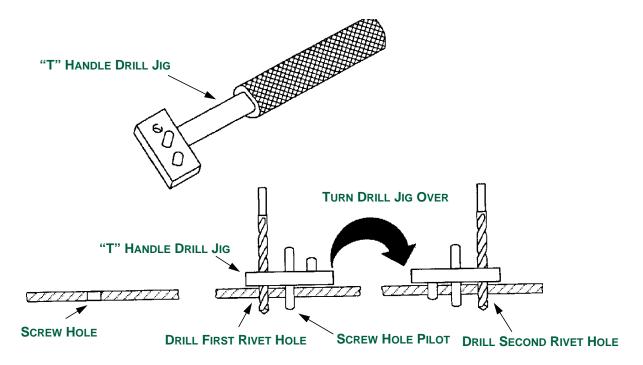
TYPICAL USE OF "T" HANDLE DRILL JIG
